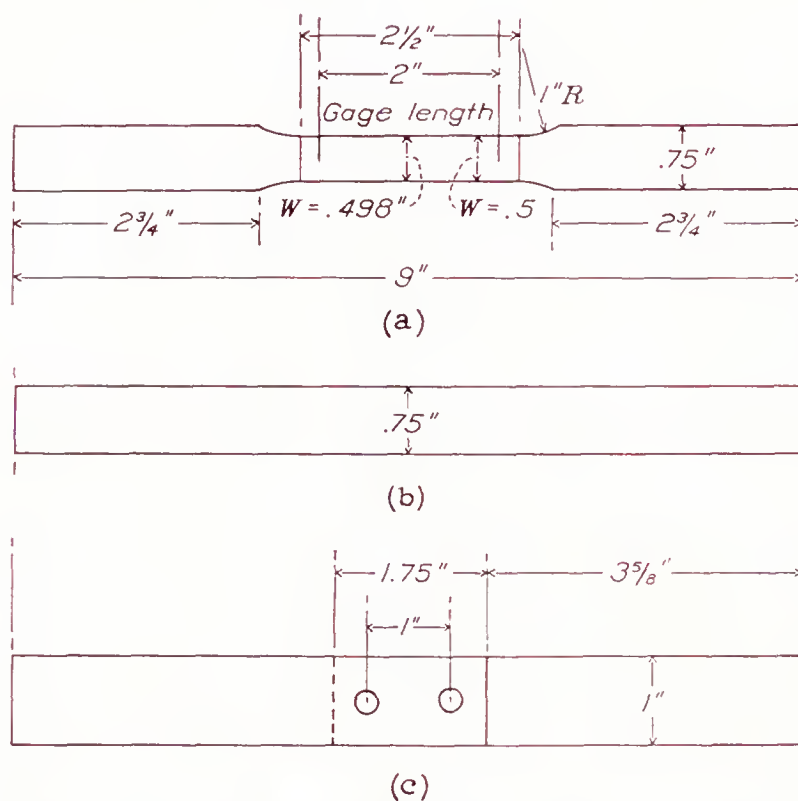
Dimensions of 0.064-inch thick aluminum-alloy materials used in the weathering tests. (a), tensile bar; (b), strip sample; (c), spot-welded or riveted panel. The welds and rivet heads were approximately  $\frac{1}{4}$  inch in diameter; the rivet shanks were  $\frac{1}{8}$  inch in diameter.
